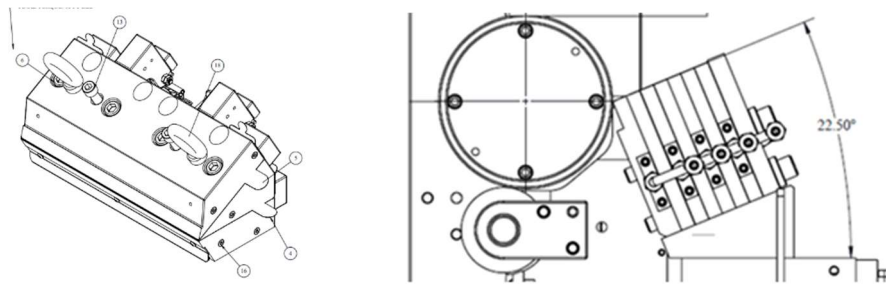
Drawing of (left) dual layer slot die and (right) 7-layer slide die.
